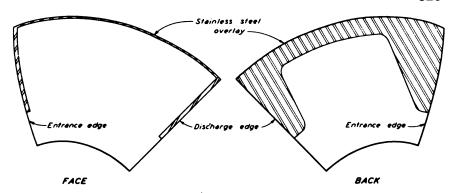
Stainless steel overlay on Kaplan blade.
